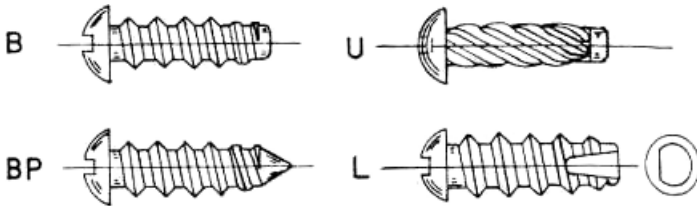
Thread-forming and thread-cutting screws most often used in thermoplastic materials.
